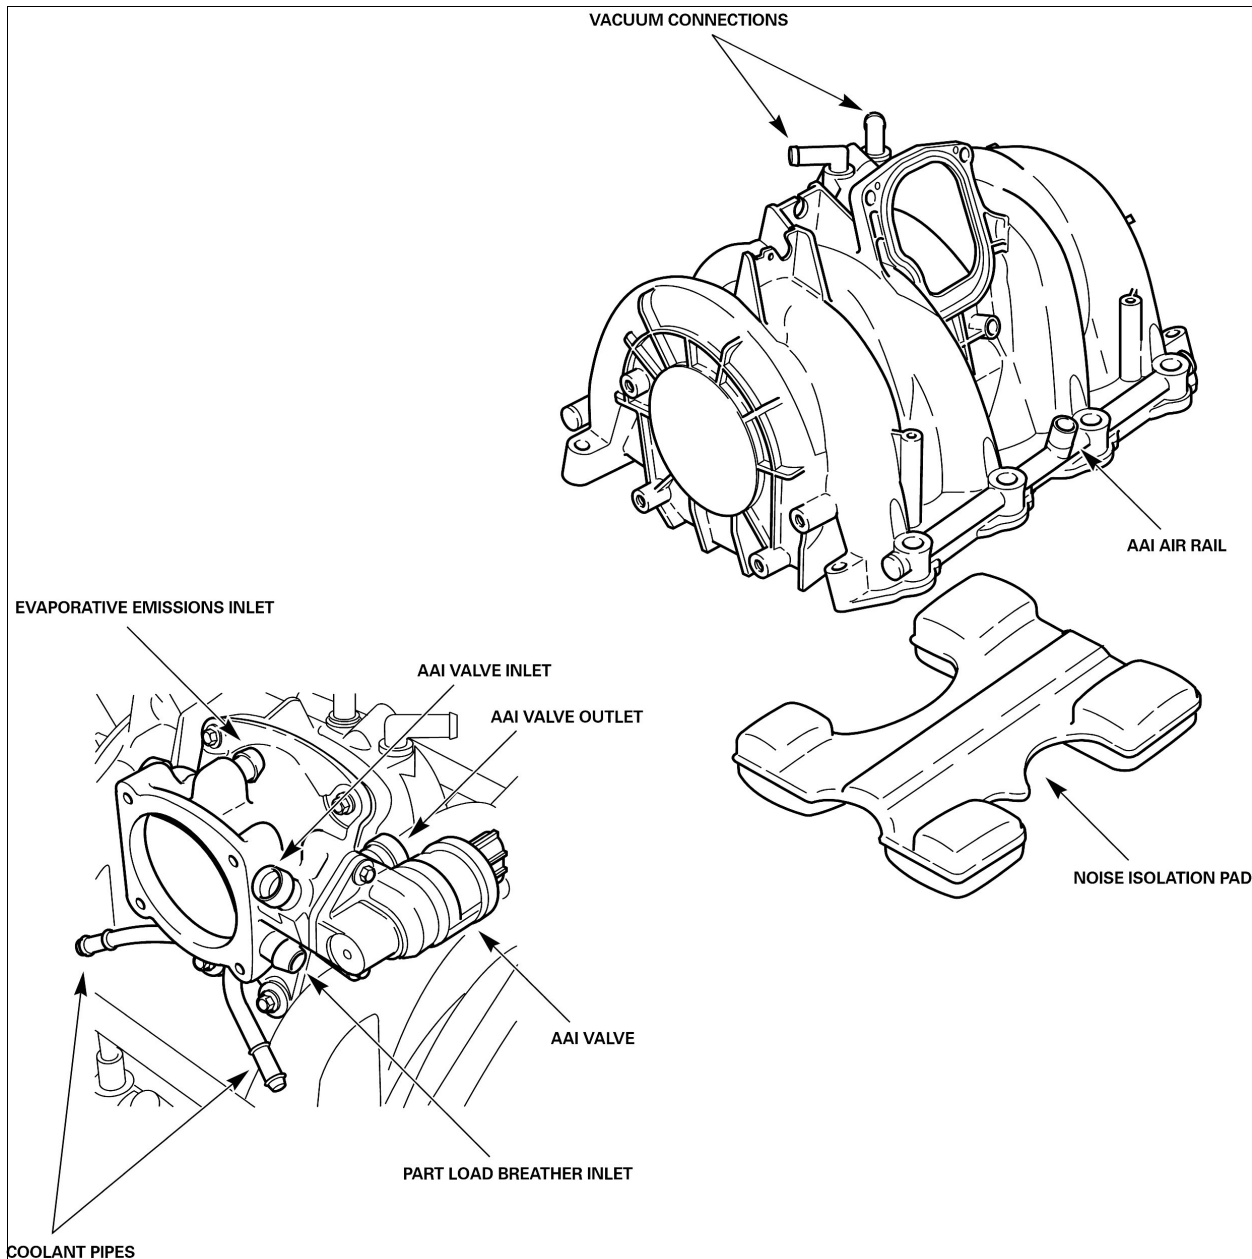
INTAKE MANIFOLD, THROTTLE ADAPTOR AND ISOLATION PAD – V8
